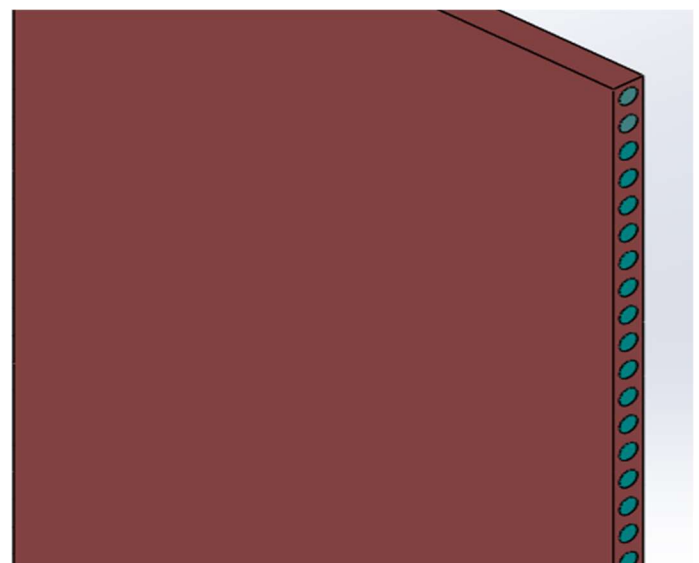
ENLARGED VIEW OF ALUMINIUM PLATE
